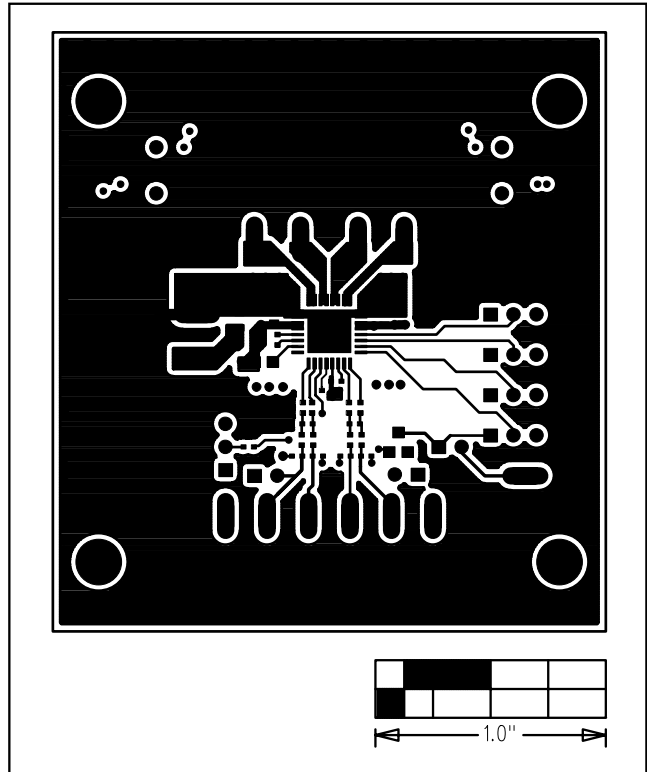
MAX9714 EV Kit PC Board Layout—Component Side
